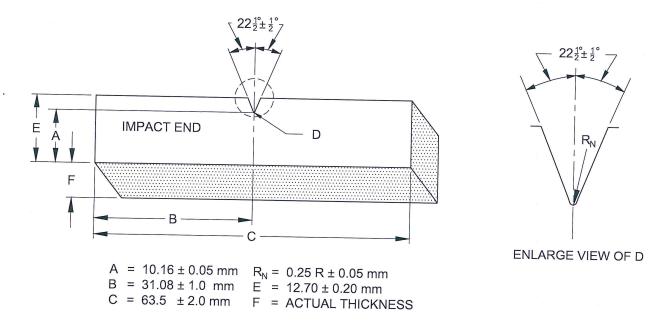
DIMENSIONS OF IZOD TEST SPECIMEN
